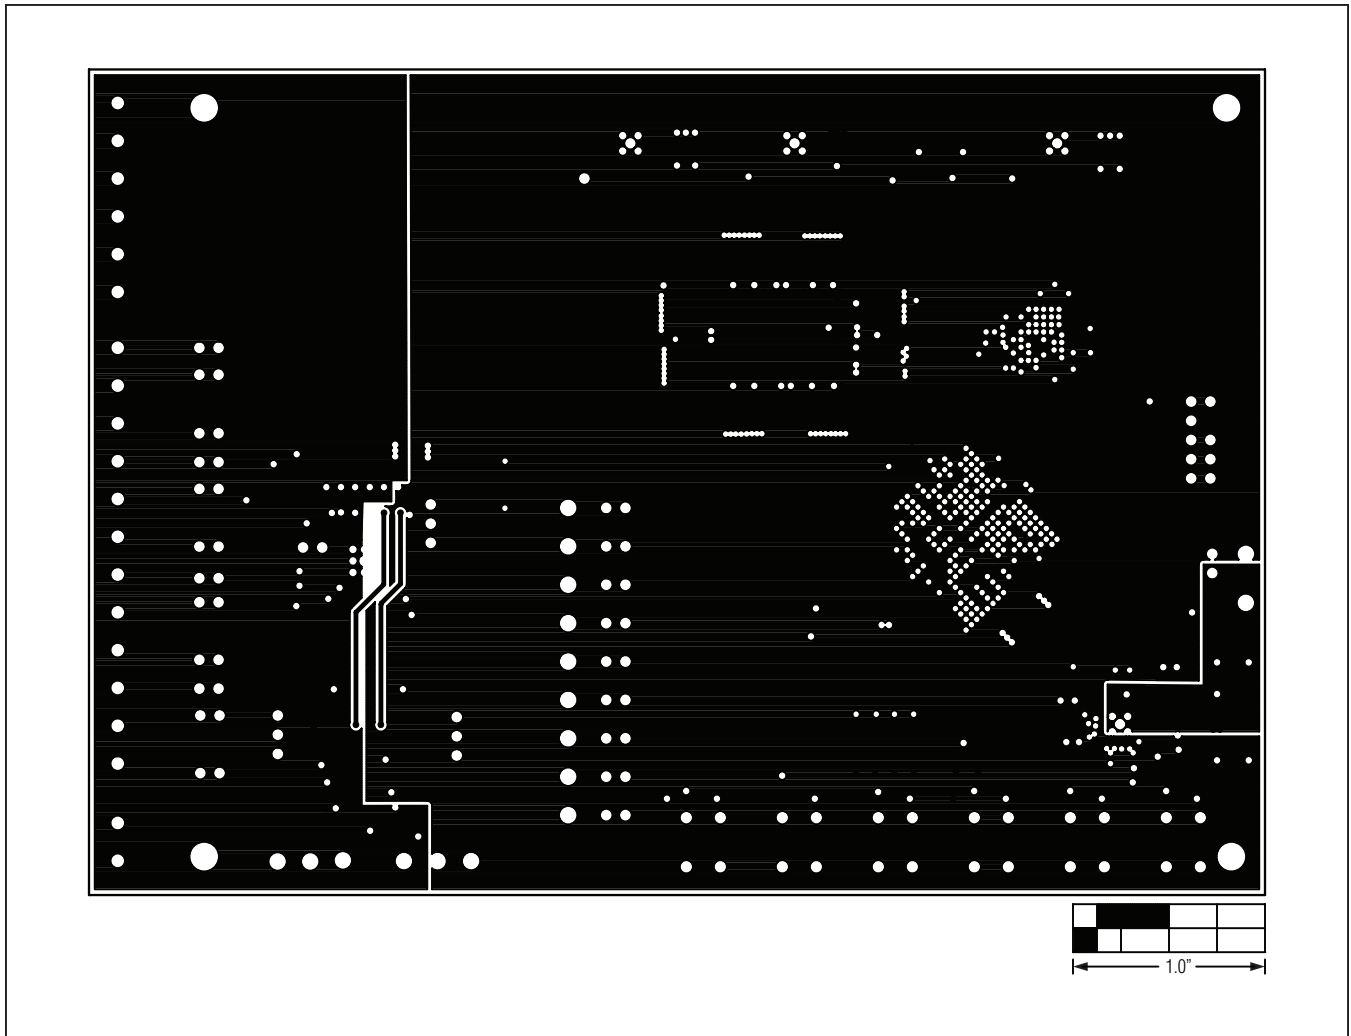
MAX11043 EV Kit PCB Layout—Ground Layer 4
